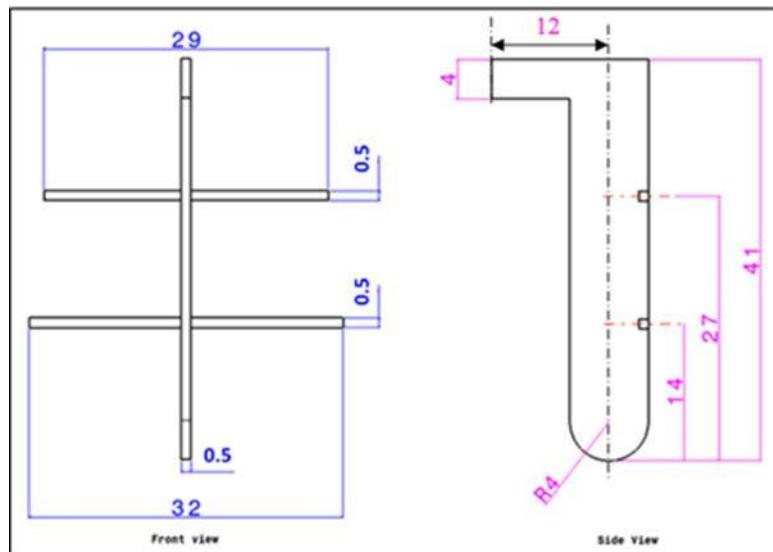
Roll Cage Template Drawing (All Dimensions are in inches)
